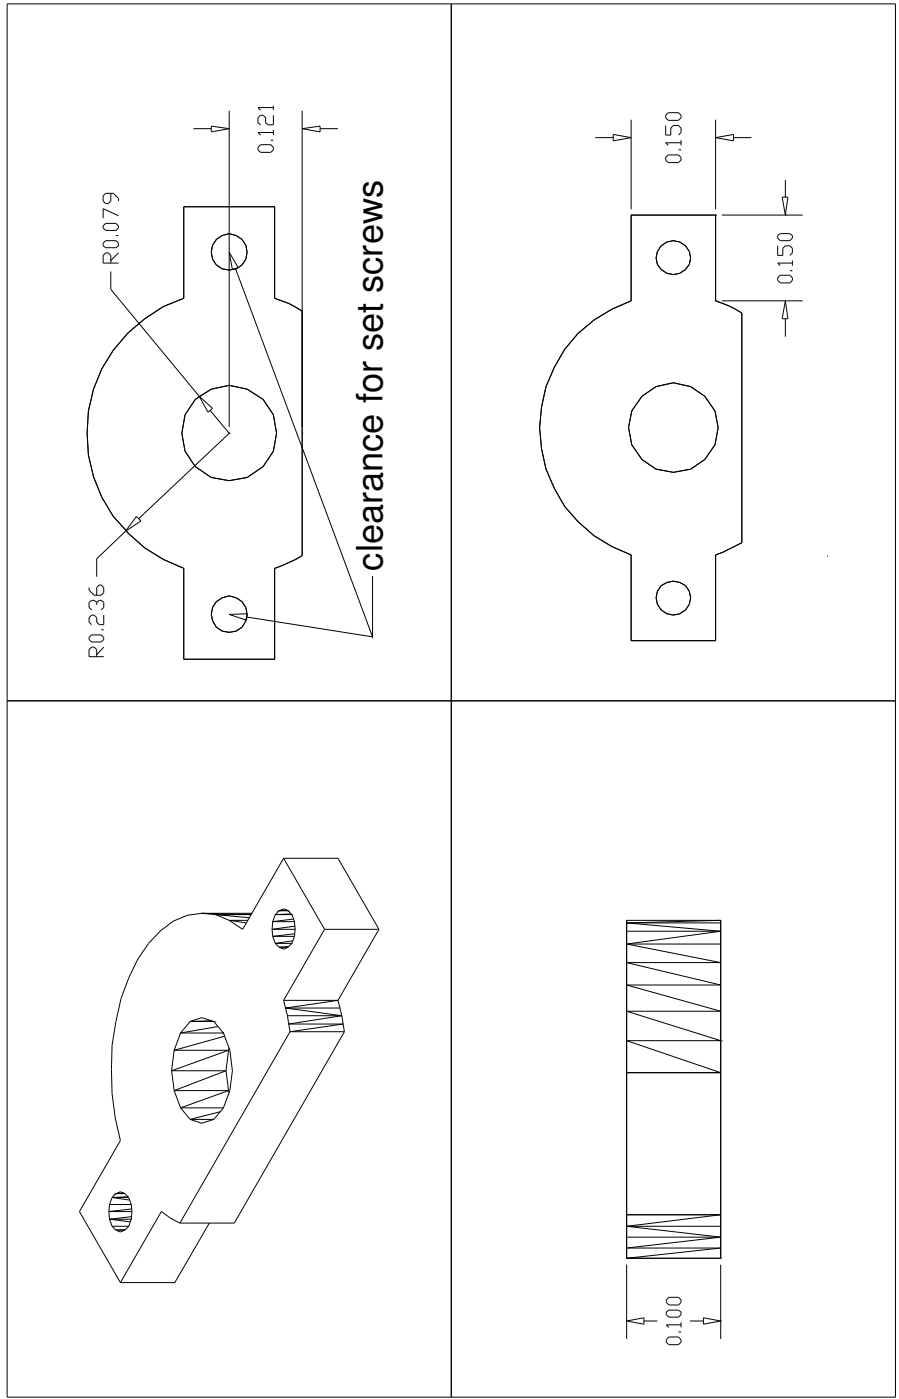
Dimensioned holder for hyperhemispherical lens. Dimensions are in inches.
